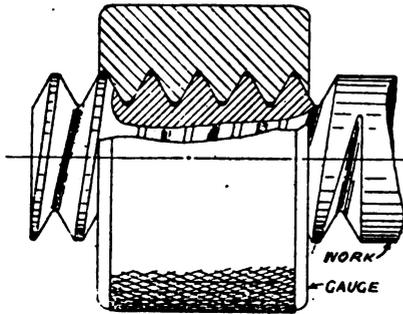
Showing Clearance at Bottom of Spaces in Ring Gauges to clear Flat Tops of Work Threads
